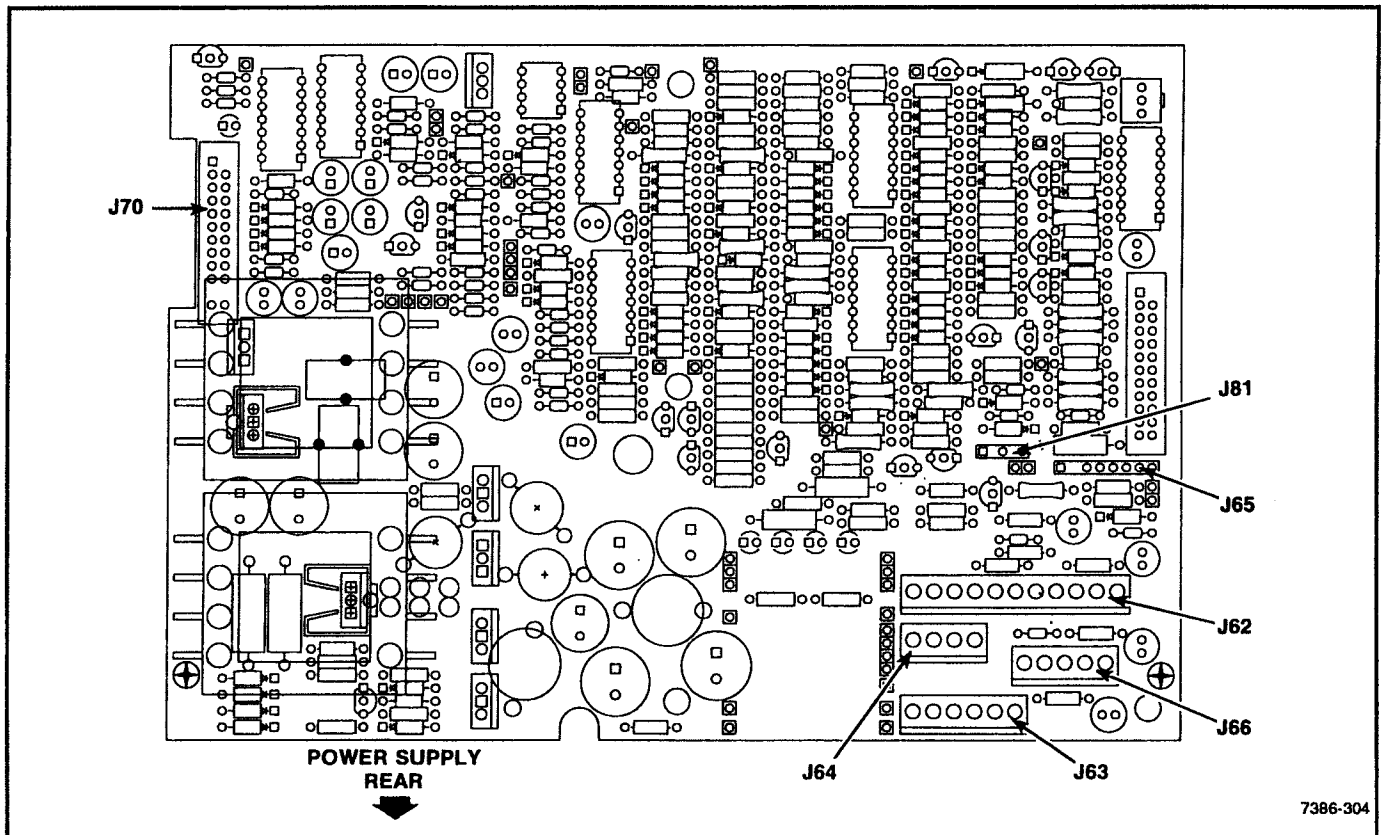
Bottom view of the A2A2 Control Rectifier board showing connector locations.
